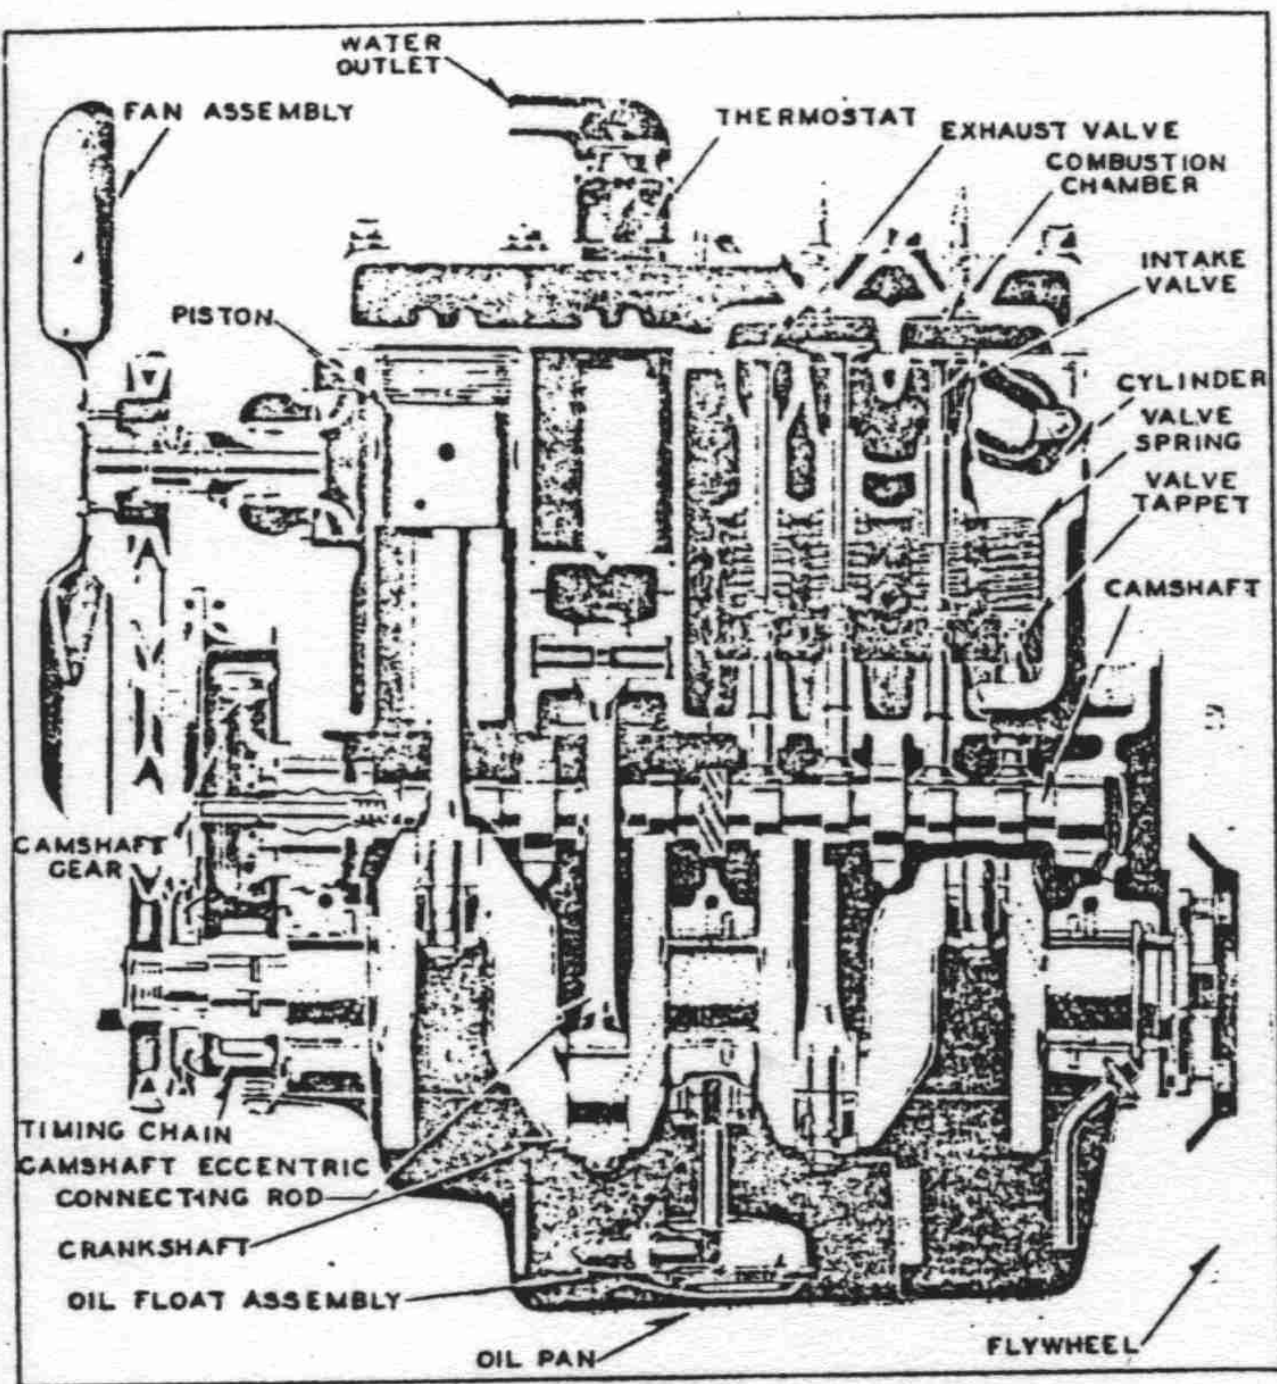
SIDE SECTIONAL VIEW OF ENGINE
